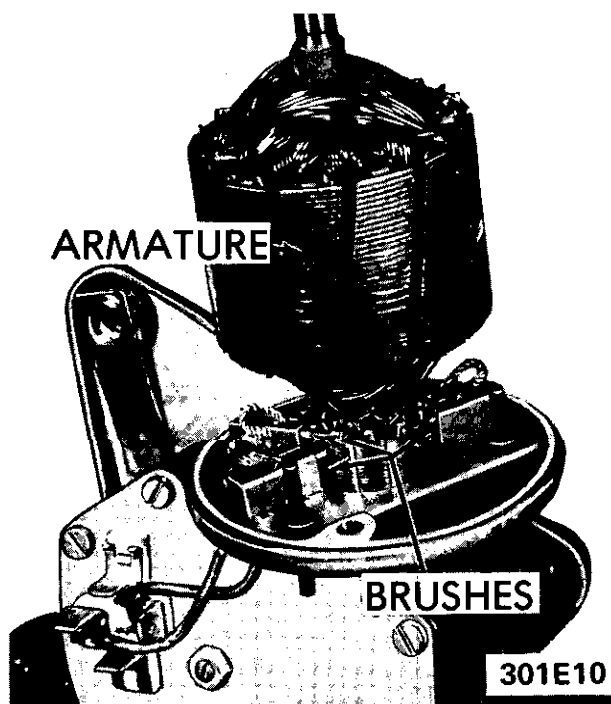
E-10 Transmission and Armature Removed from Motor Housing
